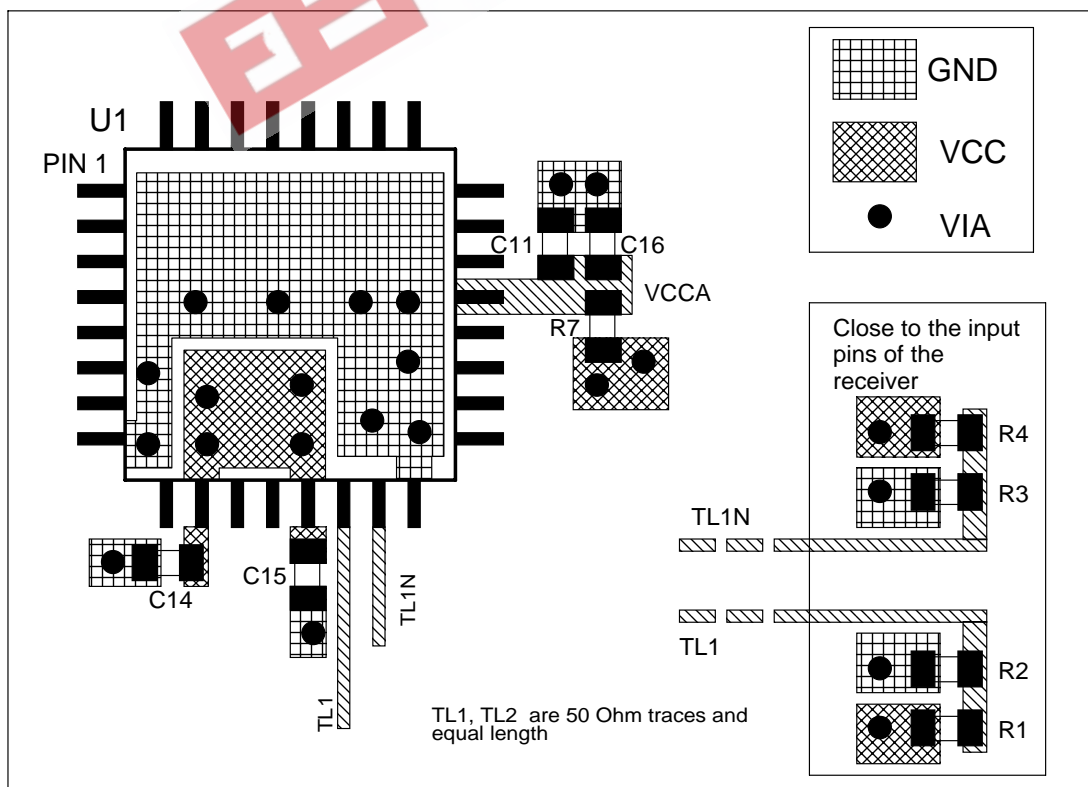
B. PCB BOARD LAYOUT FOR ICS8432-101
